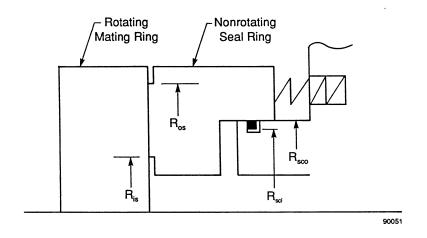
Face Seal Configuration (Piston Ring on ID of Seal Ring)
